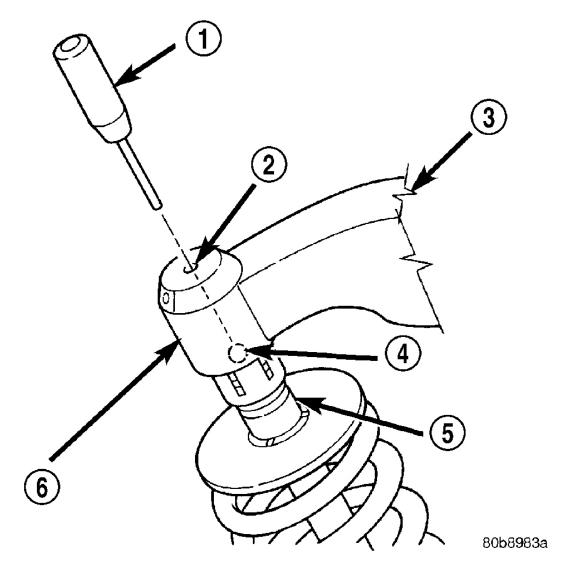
Special Tool 8351, Service Access Hole, Rocker Arm, Check Ball, Valve Tip & Lash
